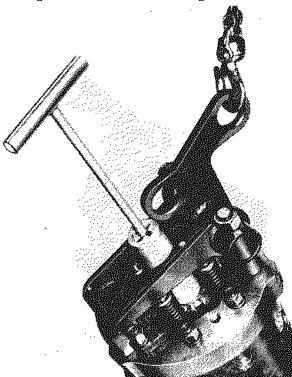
Power Assembly Installation With Lifting Clamp And Hoist
